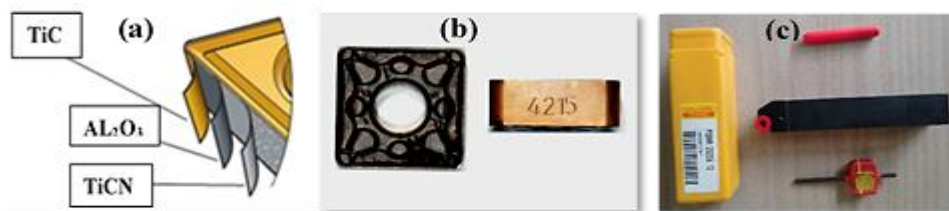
Cutting tool; (a) coating layer, (b) cutting insert and (c) tool holder
